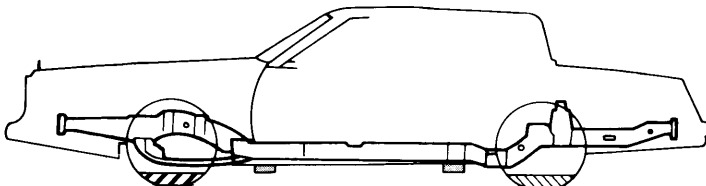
Cadillac Lifting Points (Except Eldorado and Seville)
